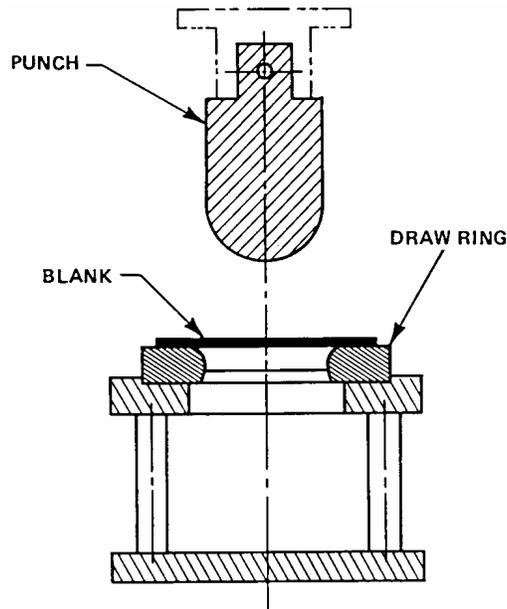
Cross-section view of a simple, single-action punch and draw ring used for deep drawing beryllium.⁸
